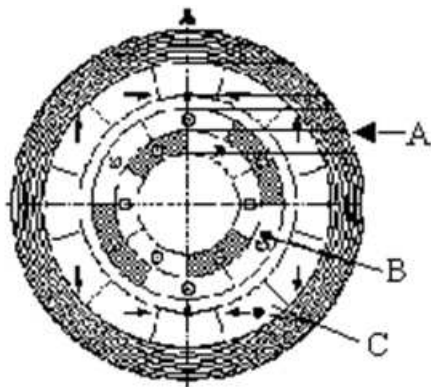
A cross-section of an ironless motor generator (complete) with the composite rotor (A is the composite ring, B is the electrical winding 3-phase 4 pole, C is the magnet array)
